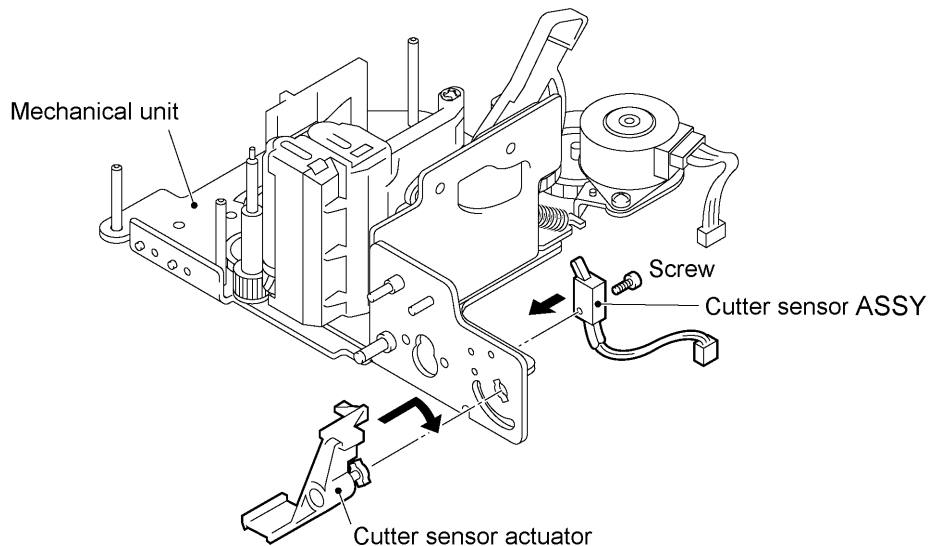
Installing the Cutter Sensor Actuator and Cutter Sensor ASSY
